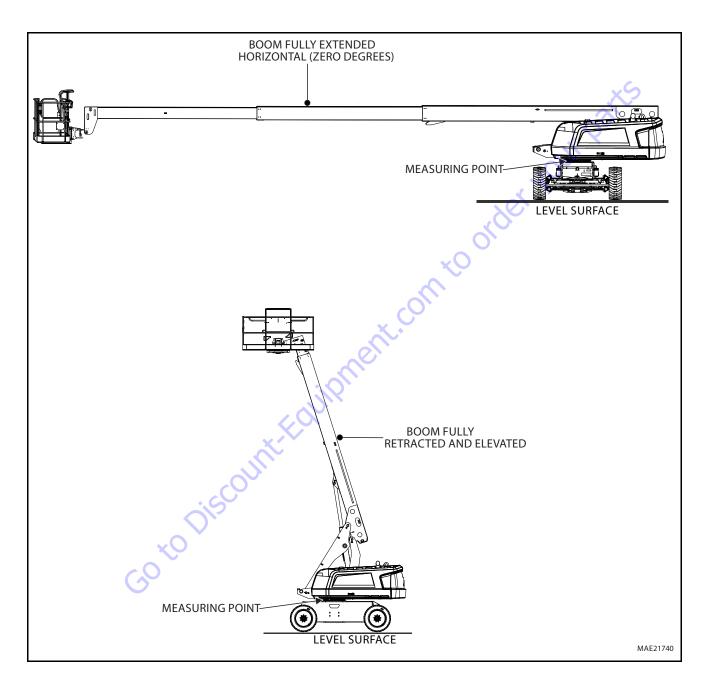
Swing Bearing Tolerance Measurement Location & Boom Placement
